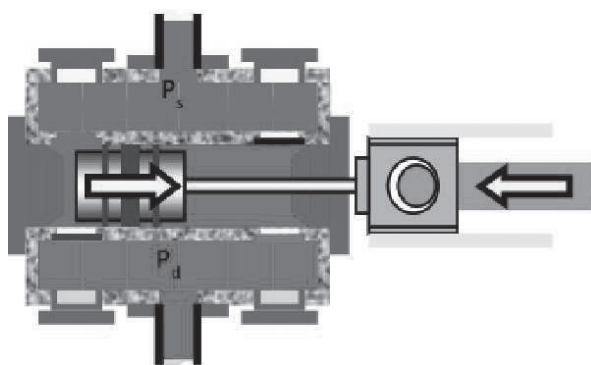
Compression process begins with leaking CE discharge valves. CE cylinder pressure is at or near discharge pressure – crosshead pin reversal has not occurred
